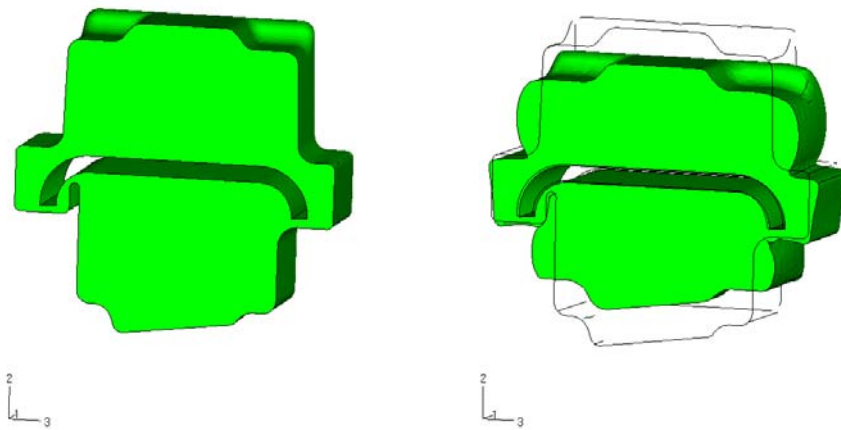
Clam shell mount as molded (left) and after assembly (right).
